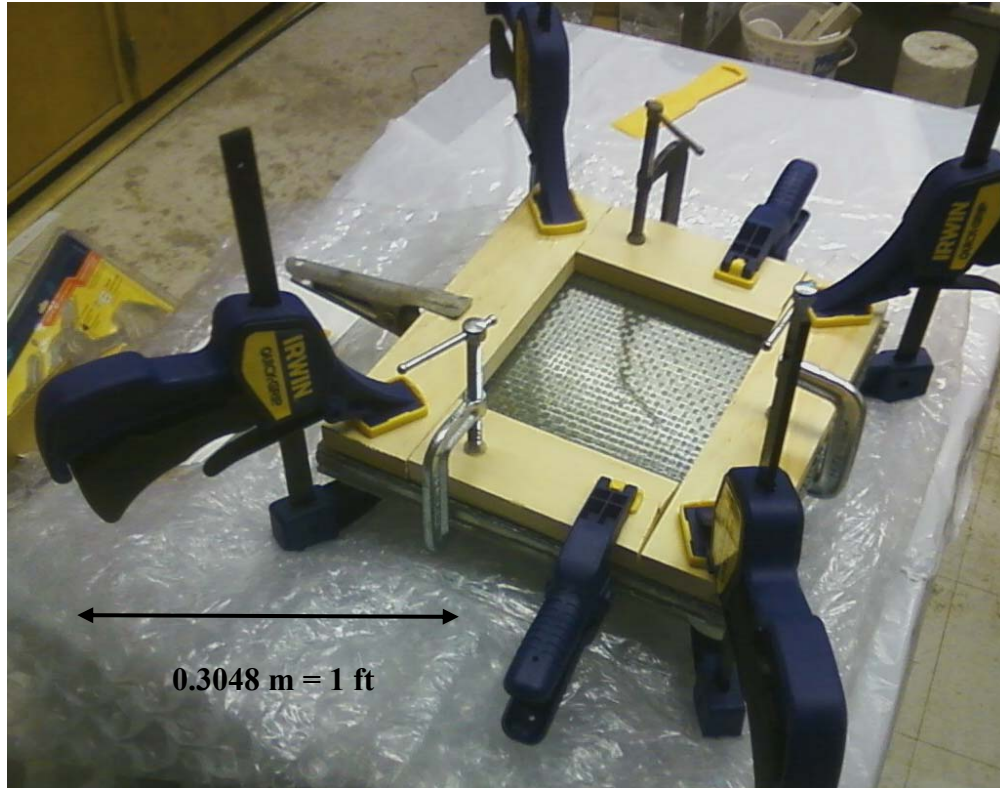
Specimen construction showing clamping of edges to ensure only a central defect
